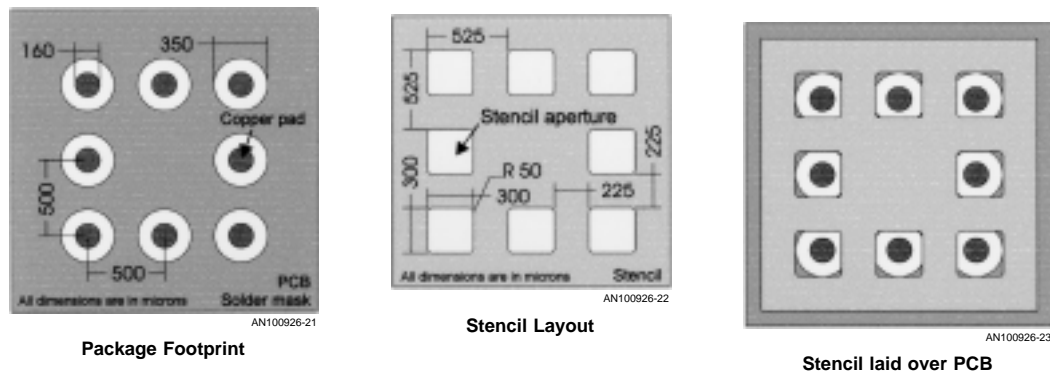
Micro SMD 8 I/O PCB &amp; Stencil Layout
